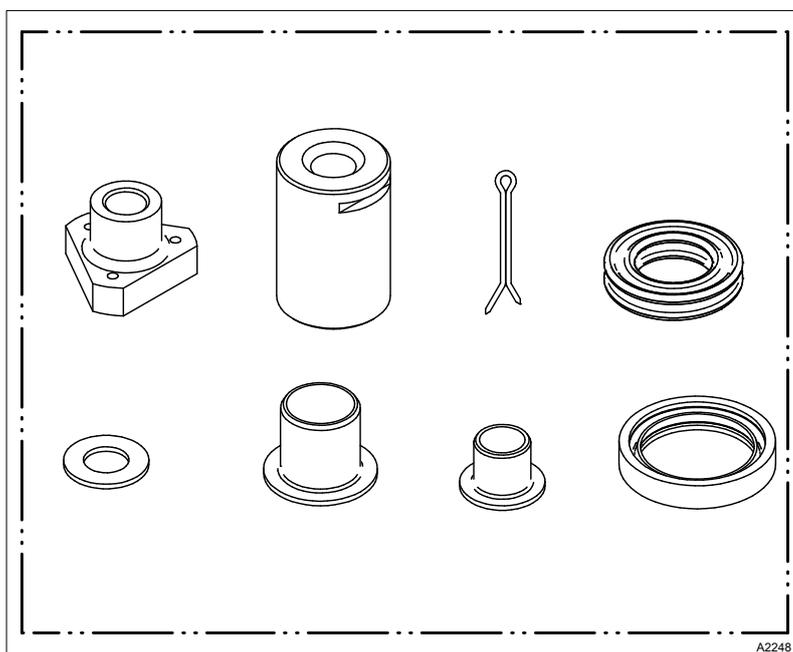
Replace these wearing parts after 1000 wiper cycles, earlier if necessary. The number of components varies depending on the type of the spare parts kit.
